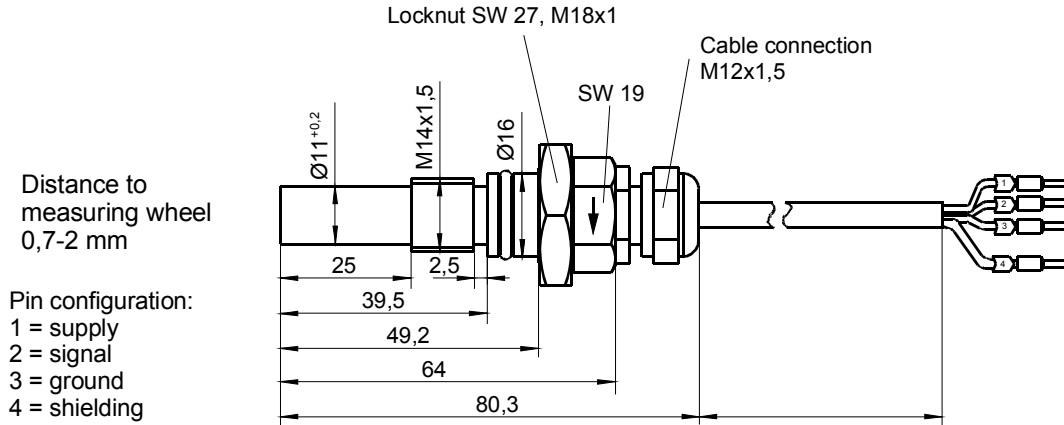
Hall Sensor HIAS(M14)0-49/600 with Cable and End Sleeves
